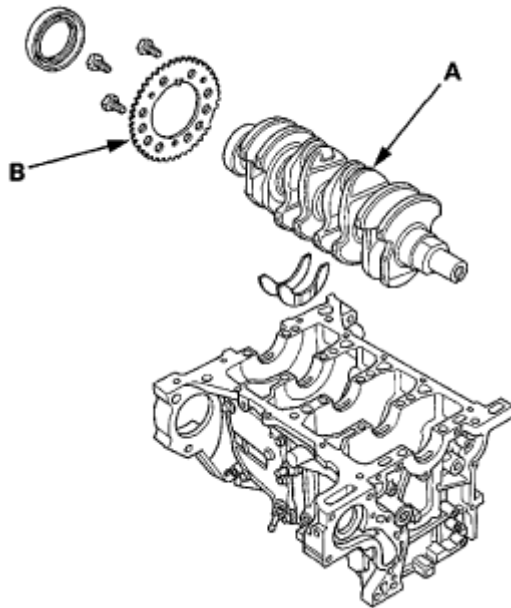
Identifying Crankshaft And CKP Pulse Plate
